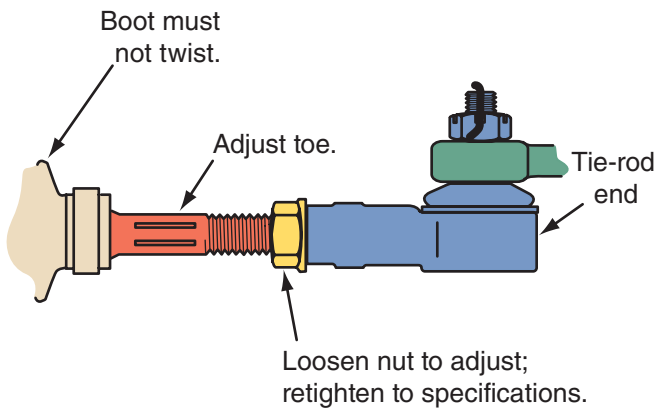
Rotating the tie-rod to adjust the toe on a rack and pinion steering gear.
